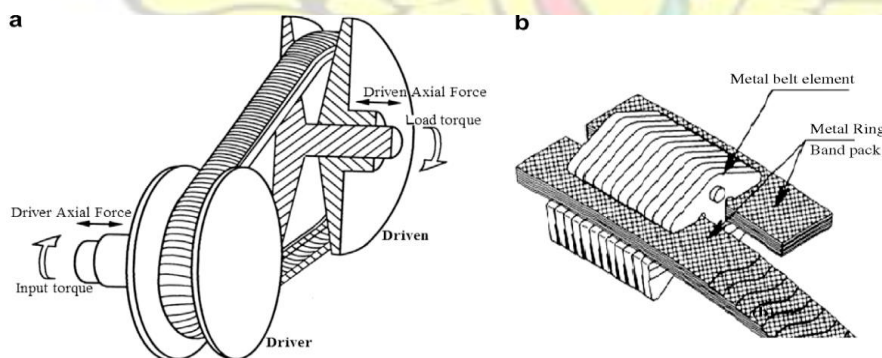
Metal V-belt CVT drive: (a) basic Layout; (b) belt structure
